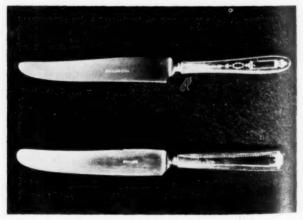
Table knife made by welding a low-carbon hollow frandle to a stainless steel blade.
